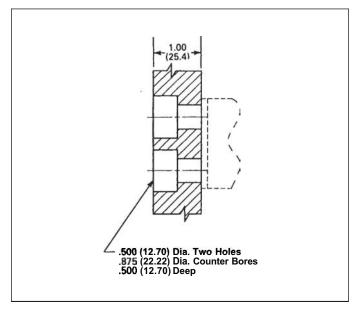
Hole Sizes for Installing Walking Beam Mounting Bracket.
